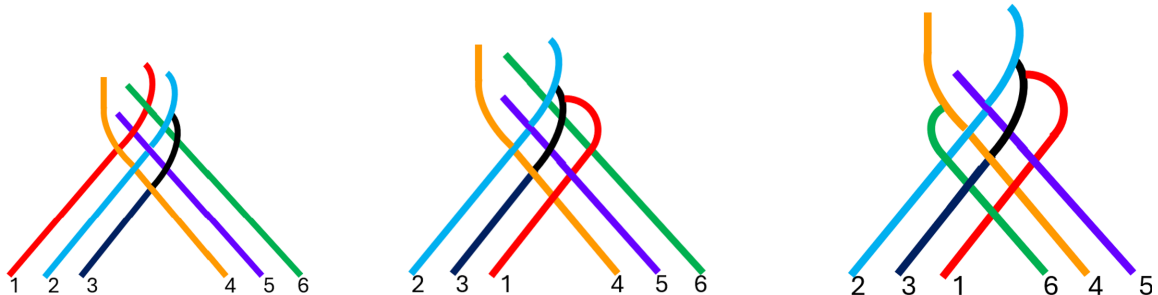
Schematic of preparing the braided cable (from left to right, they are Step A, Step B, and Step C).
